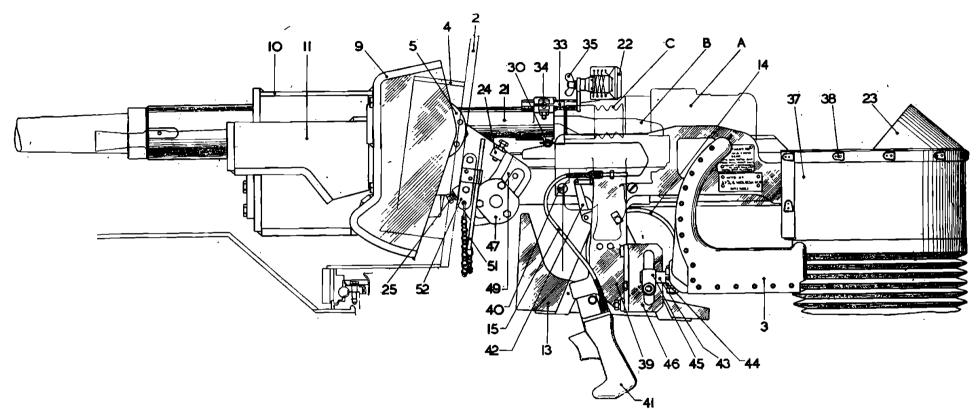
Mounting 37 m/m and Med. Besa No. 1, Mark I. Side View
